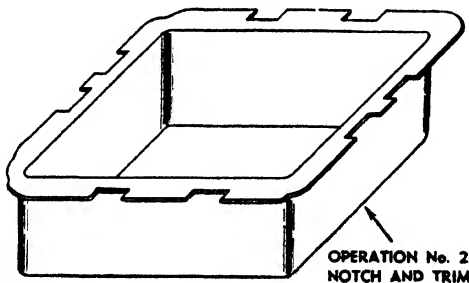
After drawing, as in Fig. 52, the flange is notched as here shown.
